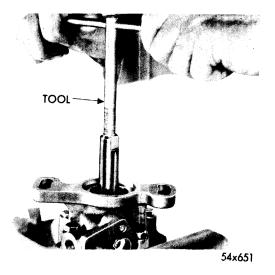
Removing Pump Body Shaft Bushing (Tool C-3185)
